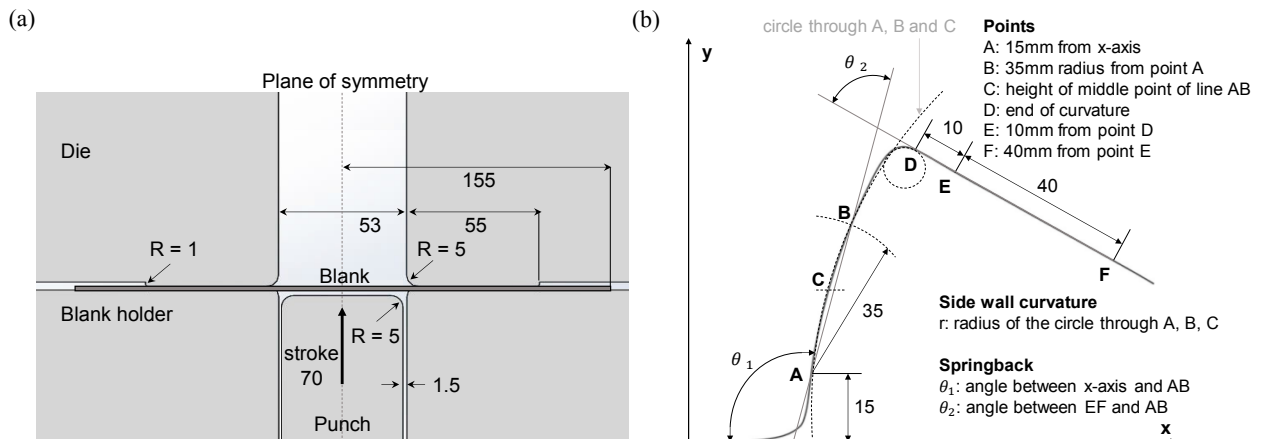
(a) Schematic view of 2D draw bending test with dimensions according to [11]; (b) Parameters for springback and side wall curl evaluation according to [4]. All dimensions in mm.
